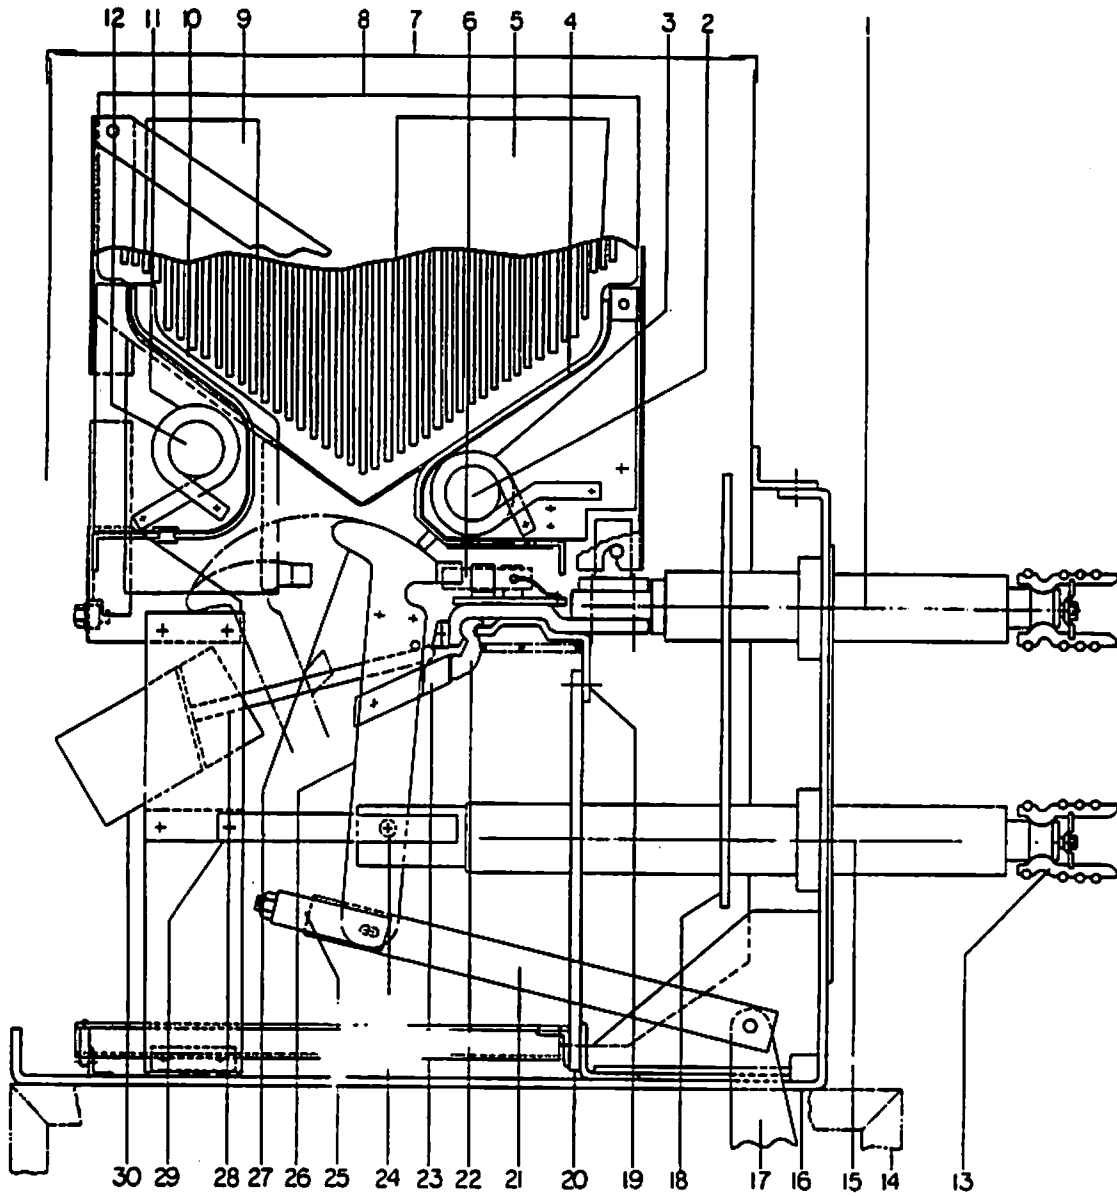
(0121C8153) Cross Section of Breaker Pole Unit
